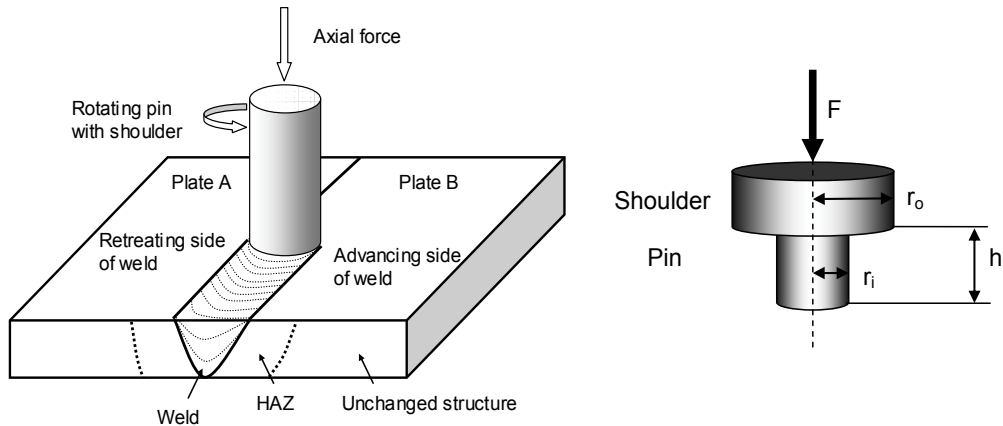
Schematics of friction stir welding process and tool geometry
